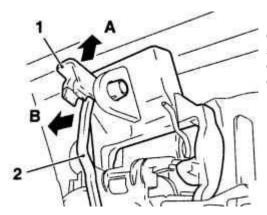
Disconnecting the draft door lock (for example, lock the rear side door): 1 - Lock clamp 2 - pull door lock, 3 - lining the back of the door lock
